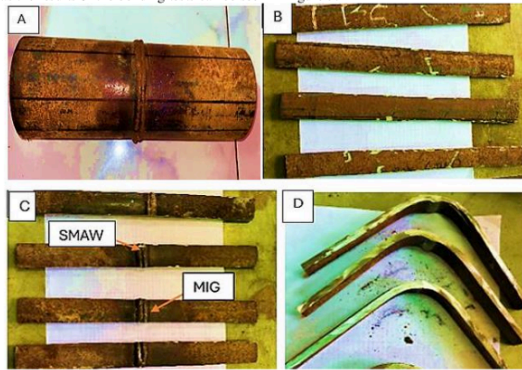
a) Welding Results, b) Raw Material, b) Specimen formation, c) Bending test results
